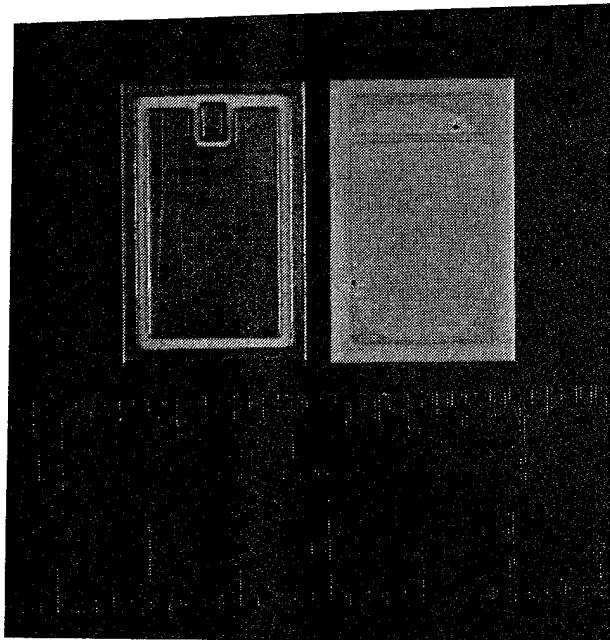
Two PEBB package prototypes showing topside and bottomside metal patterns.
